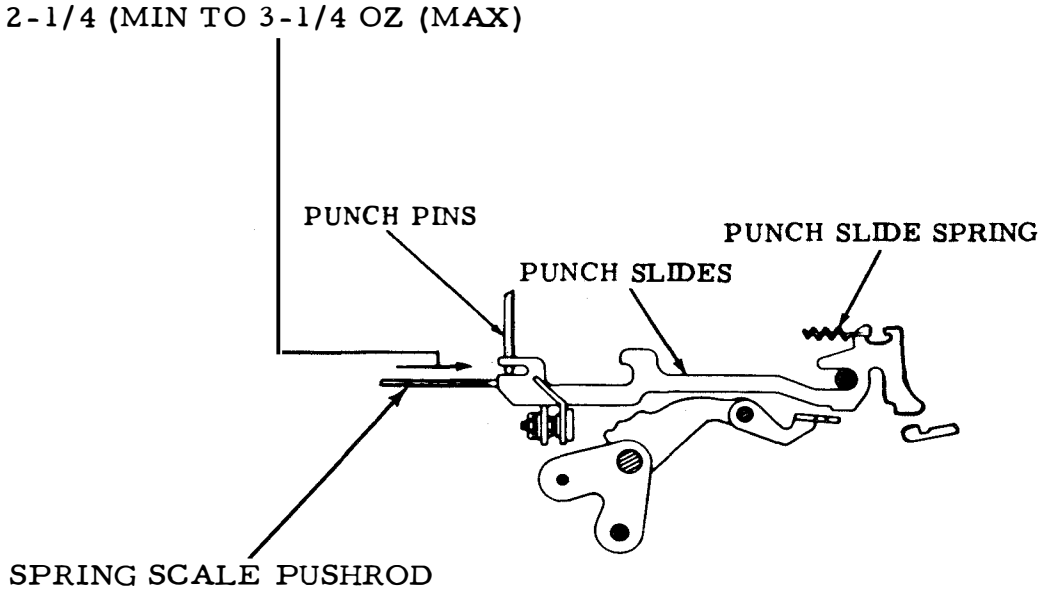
Punch Slide Spring for Fully Perforated Tape
